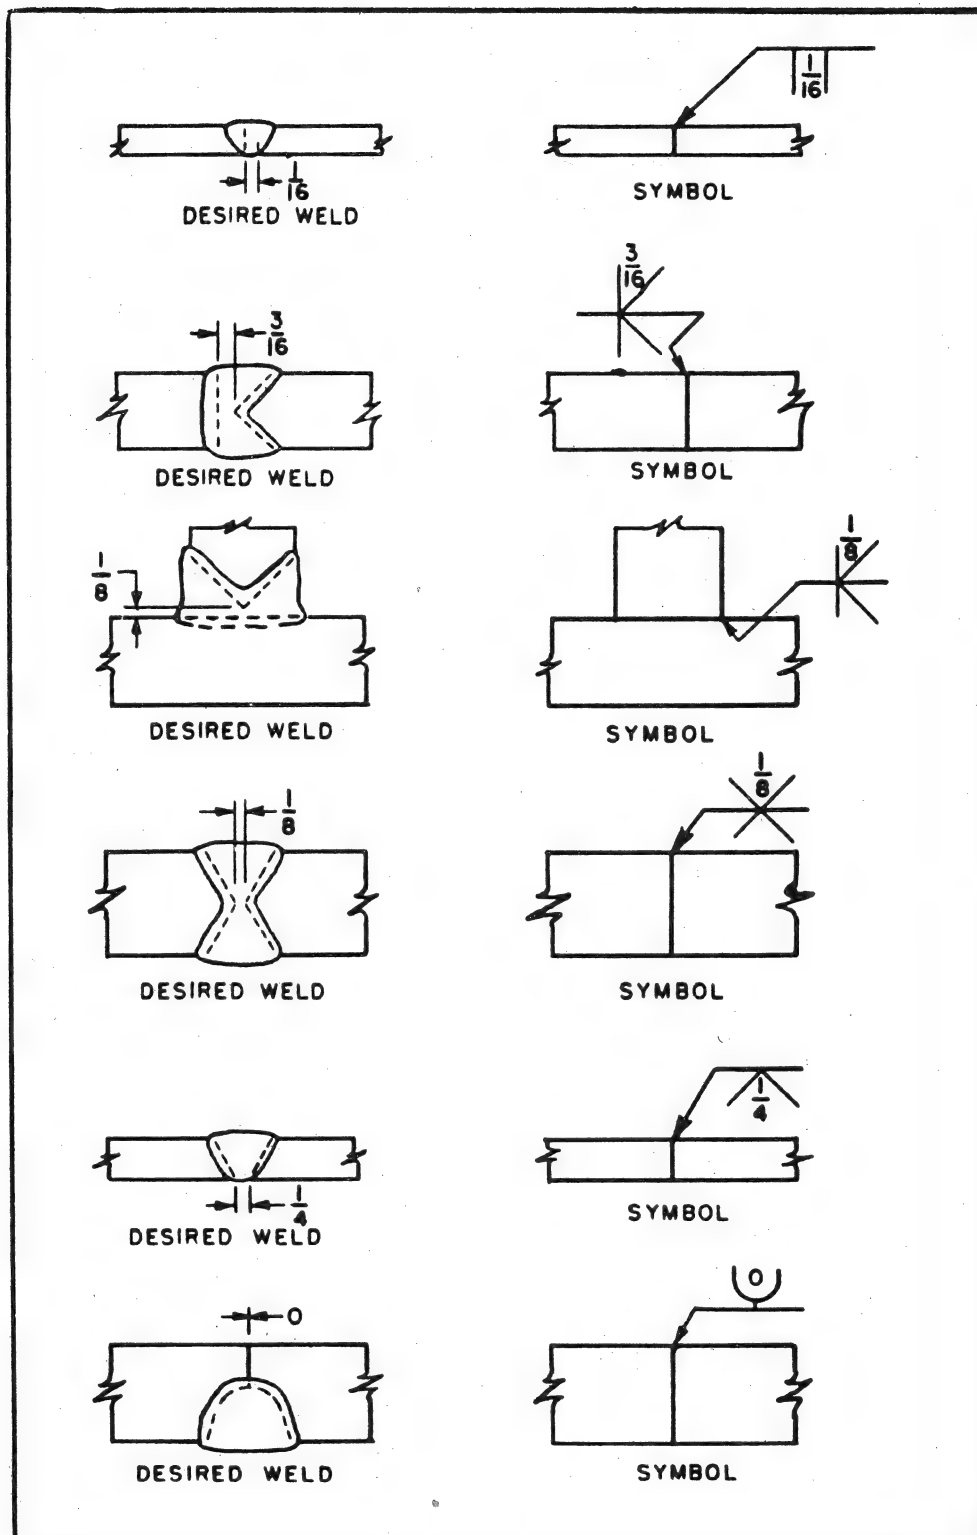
Designation of Root Opening of Groove Welds
